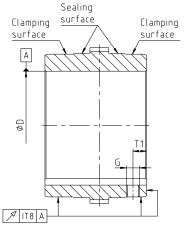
Clamping/sealing surfaces of types: DB, DAB and DH
